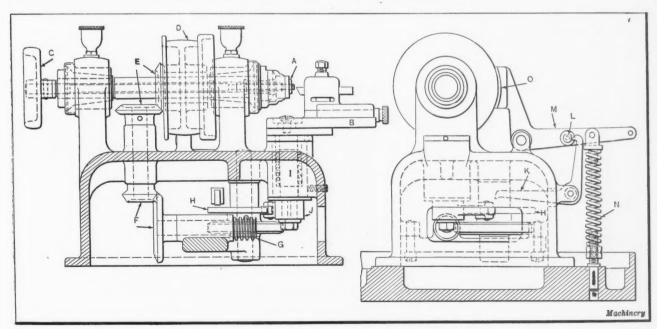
Assembly Views showing the Construction of the Hanger-turning Machine illustrated in Fig. 2
